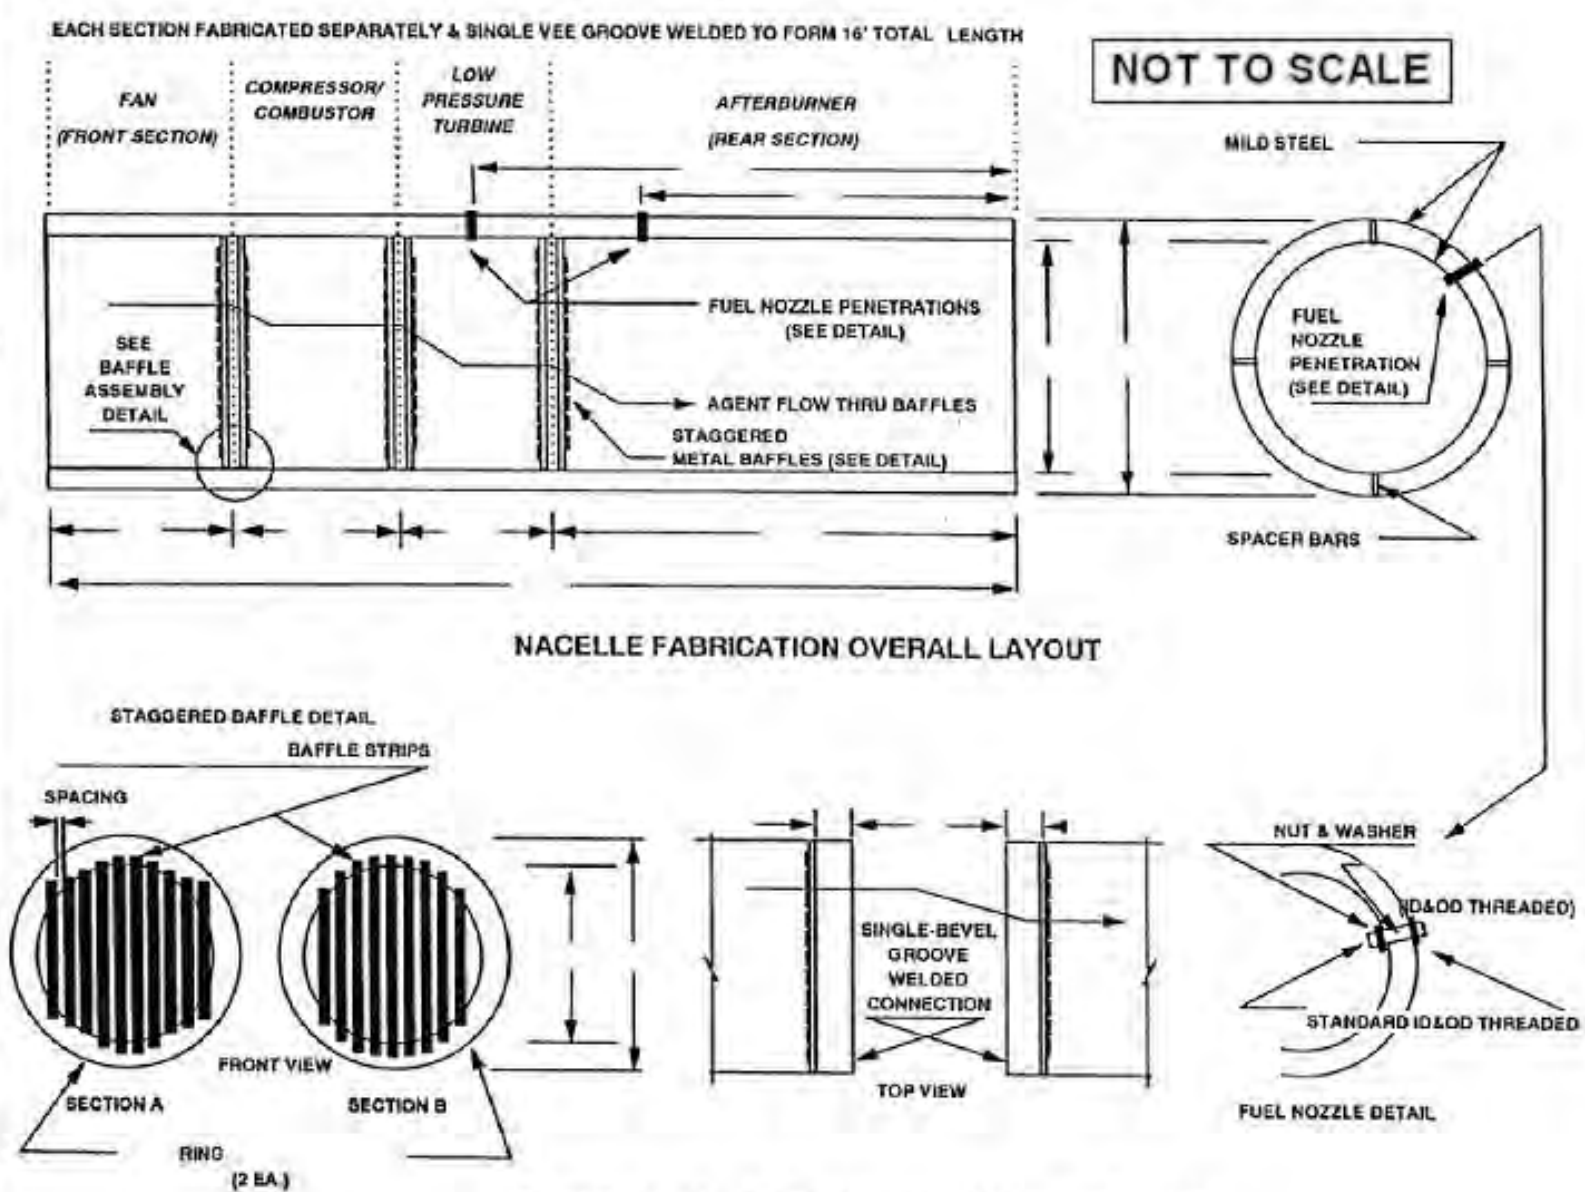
F-100 Engine-Nacelle Test Fixture; Fabrication Drawing.
